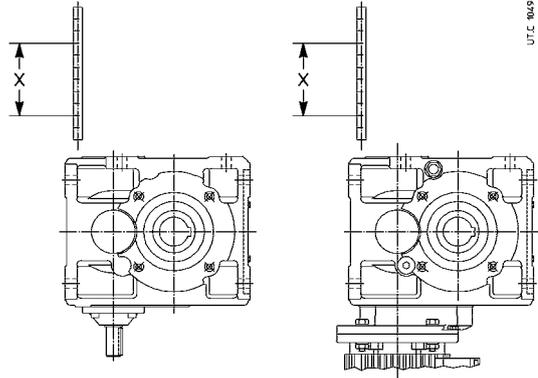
Position the bevel helical gear reducer or gearmotor, mounting position B7 for oil level (quantity) measurement.
